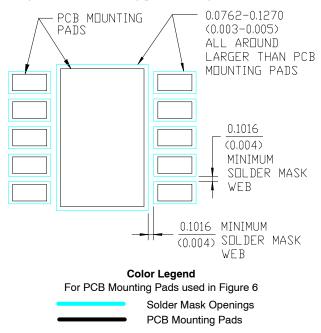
Typical DFN Package – PCB Mounting Pads Shown with Solder Mask Openings (NSMD)
